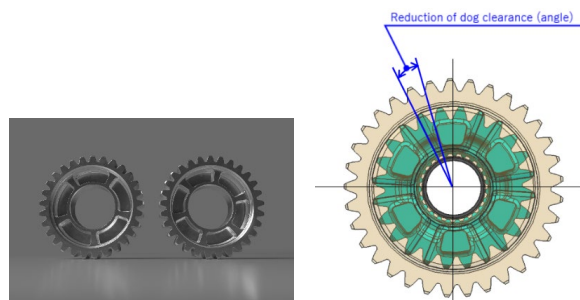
Improved Shift Feel through Transmission Gear Redesign
